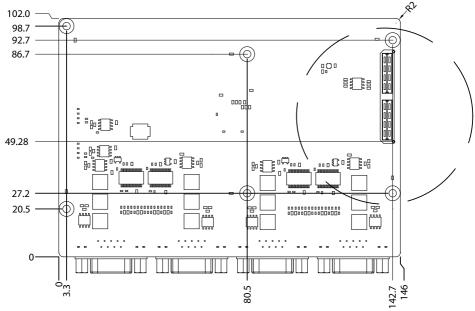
MIOe-210 Mechanical Drawing (Bottom Side)
